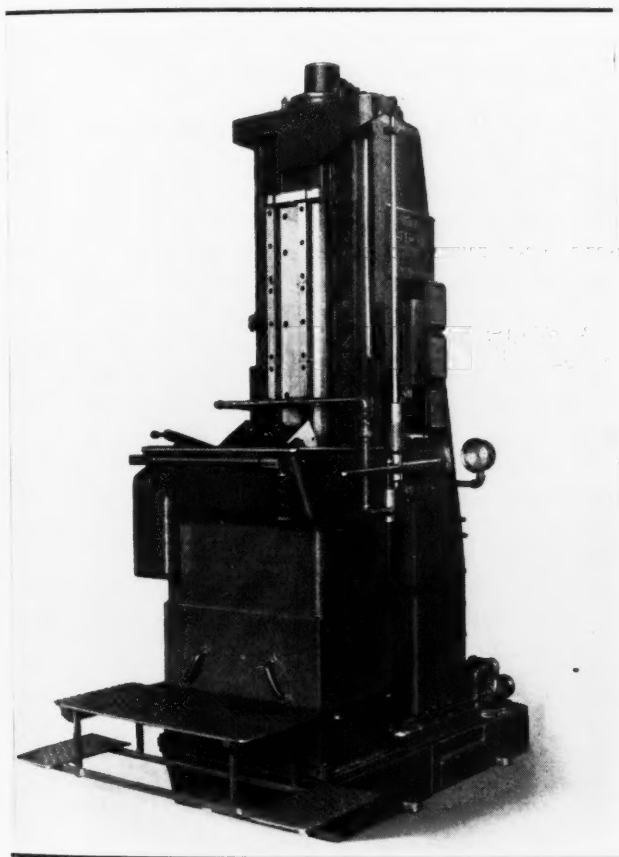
Vertical Broaching Machine that is Operated Hydraulically for Finishing the Part Shown in Fig. 3
